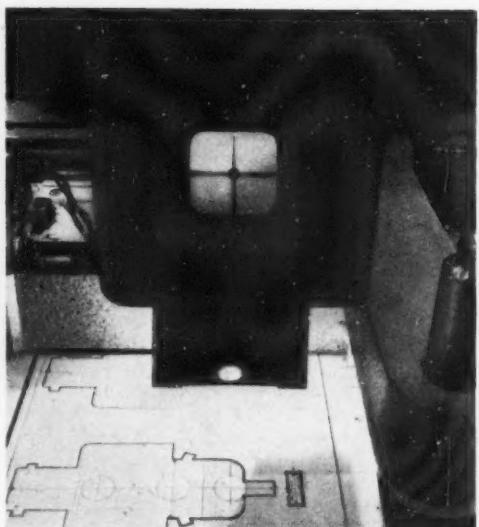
A hole location on the photo-copy of the master drawing is projected on the ground-glass screen of a 10x magnification optical viewing head
